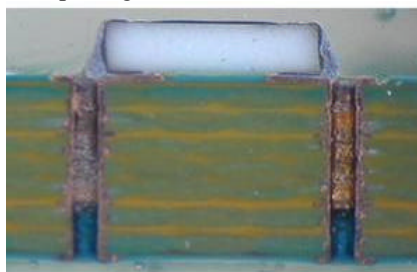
Cross sections showing examples of .008" finished hole diameter plugged vias with various component packages and board finishes
